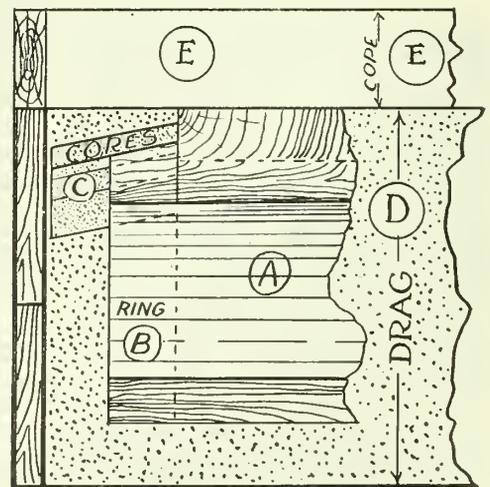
BROKEN SECTION AT X.X. FIG. 1 SHOWING CORES
